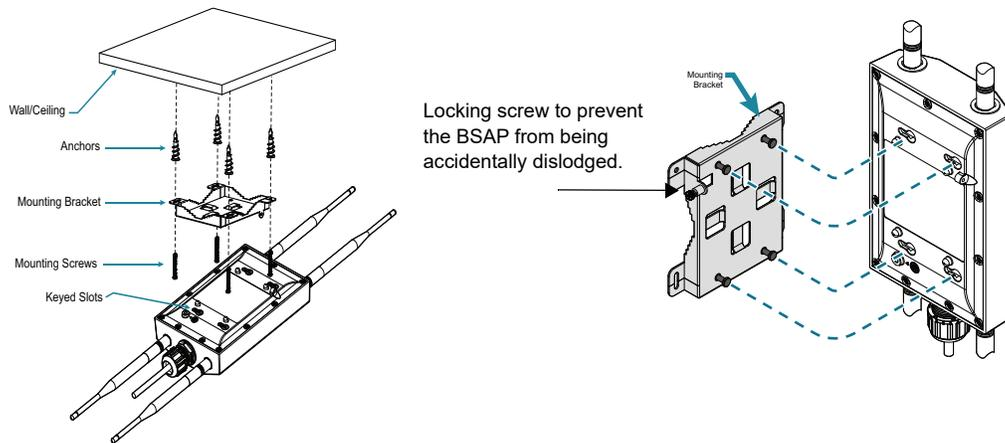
Installing the BSAP 6120 on a Wall or Ceiling and Securing BSAP to Mounting Bracket
